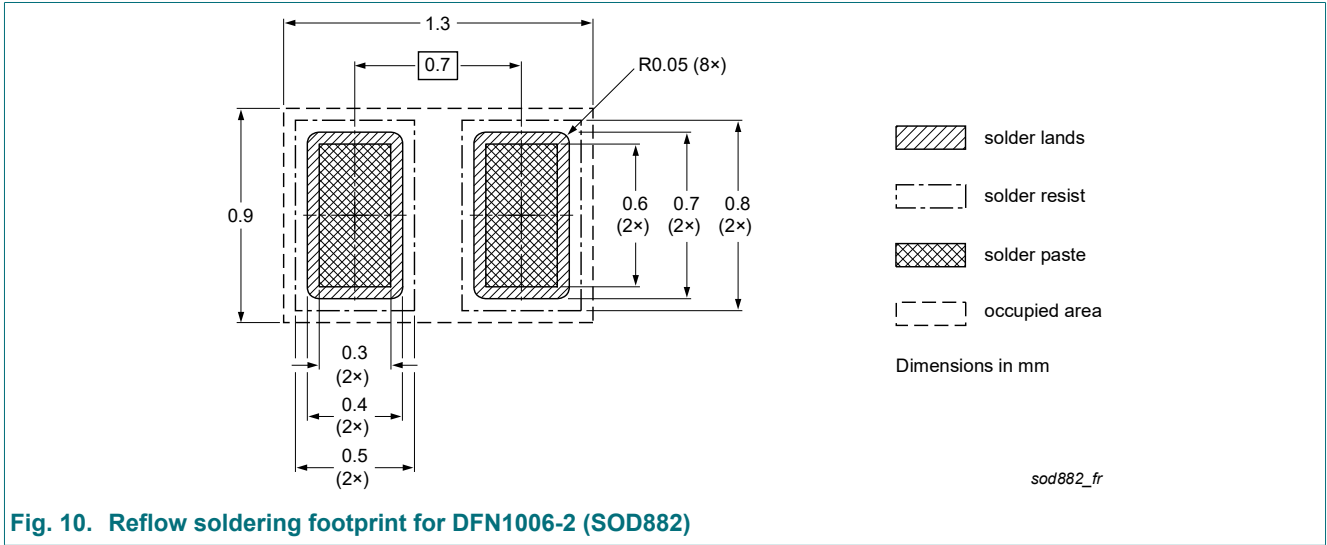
Reflow soldering footprint for DFN1006-2 (SOD882)
